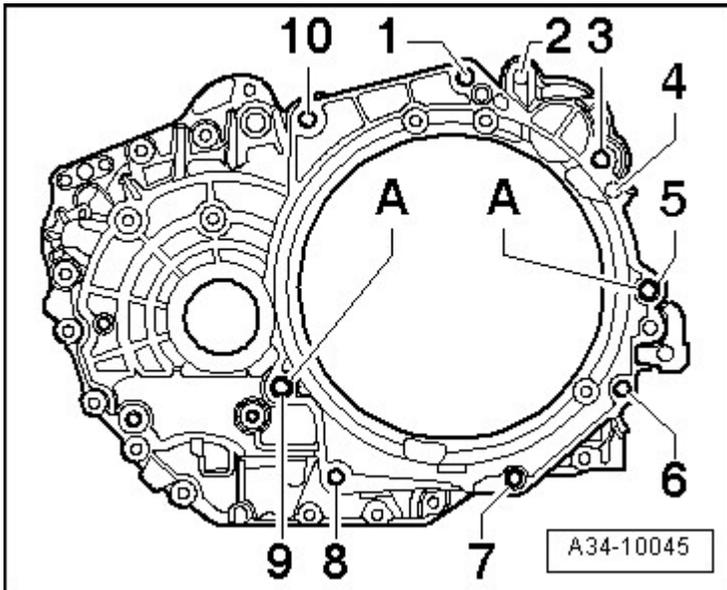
Direct Shift Automatic Transmission To Engine Mounting Bolts
